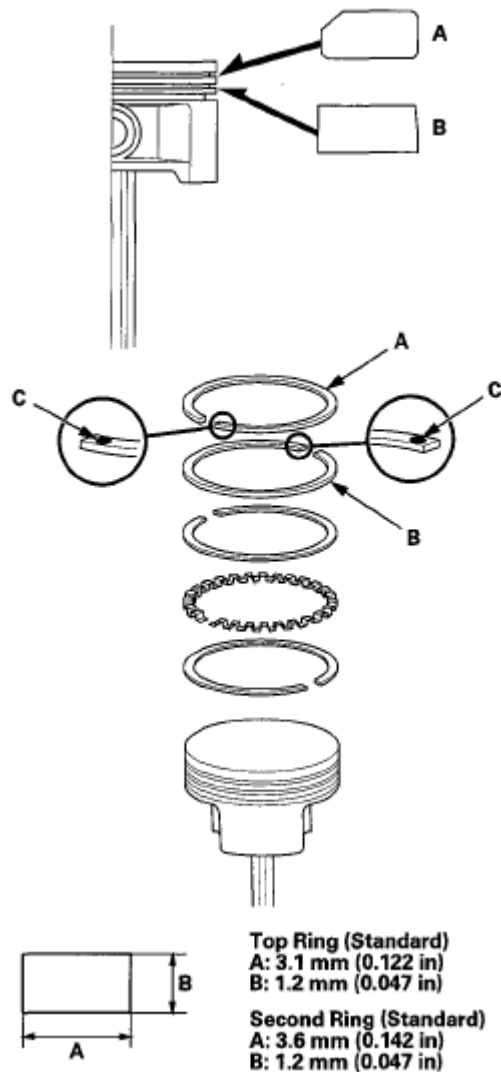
Identifying Top Ring, Second Ring And Manufacturing Marks
